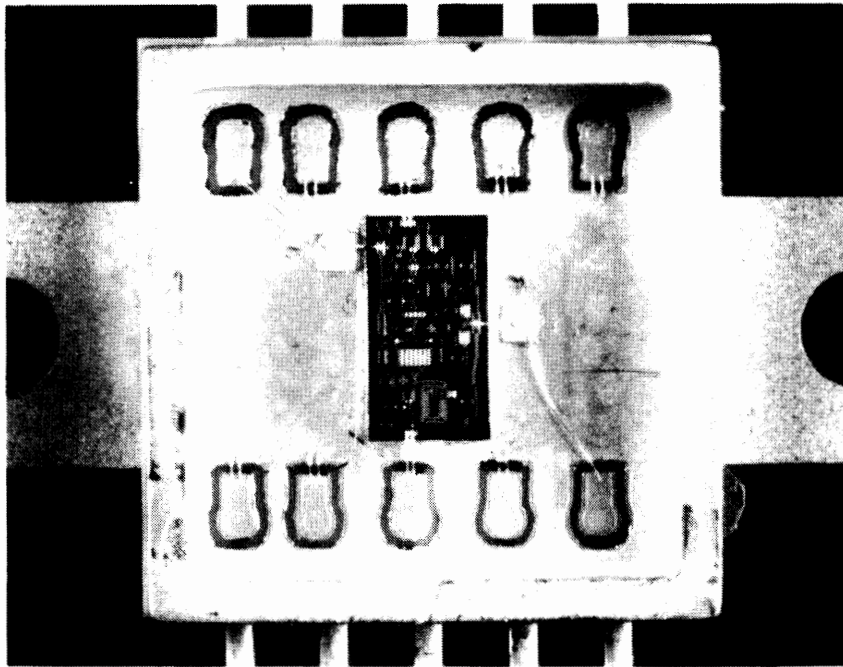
Photo of 2.4 GHz MMIC Assembly in Package
